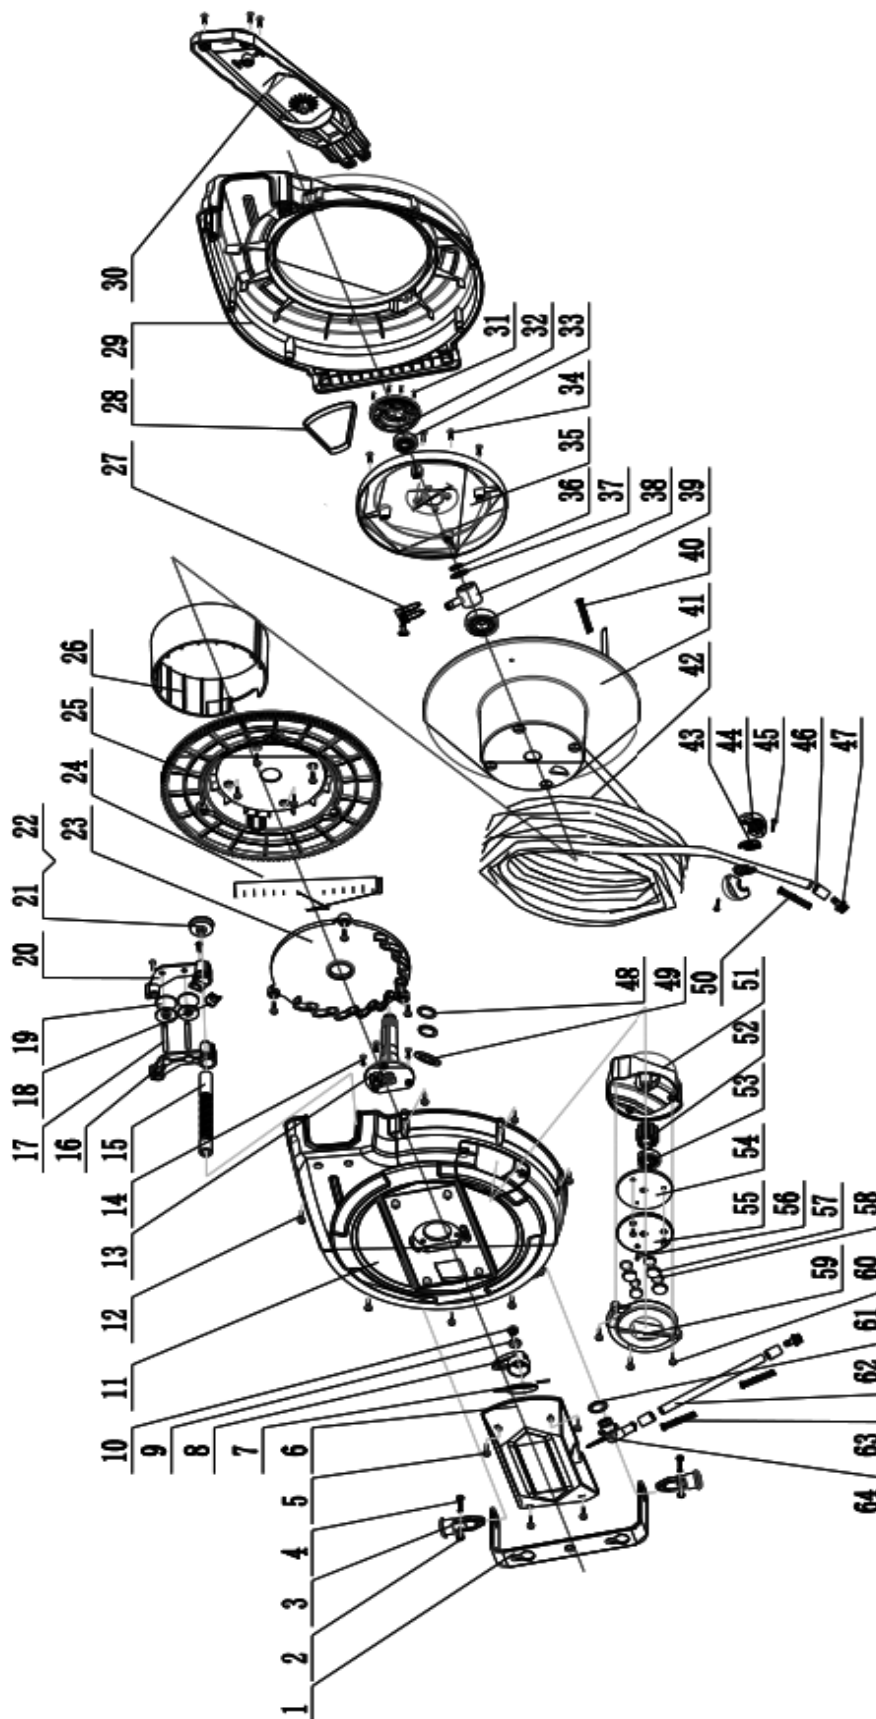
Spare parts drawing SAR 8/10 SL and SAR 8/18 SL
